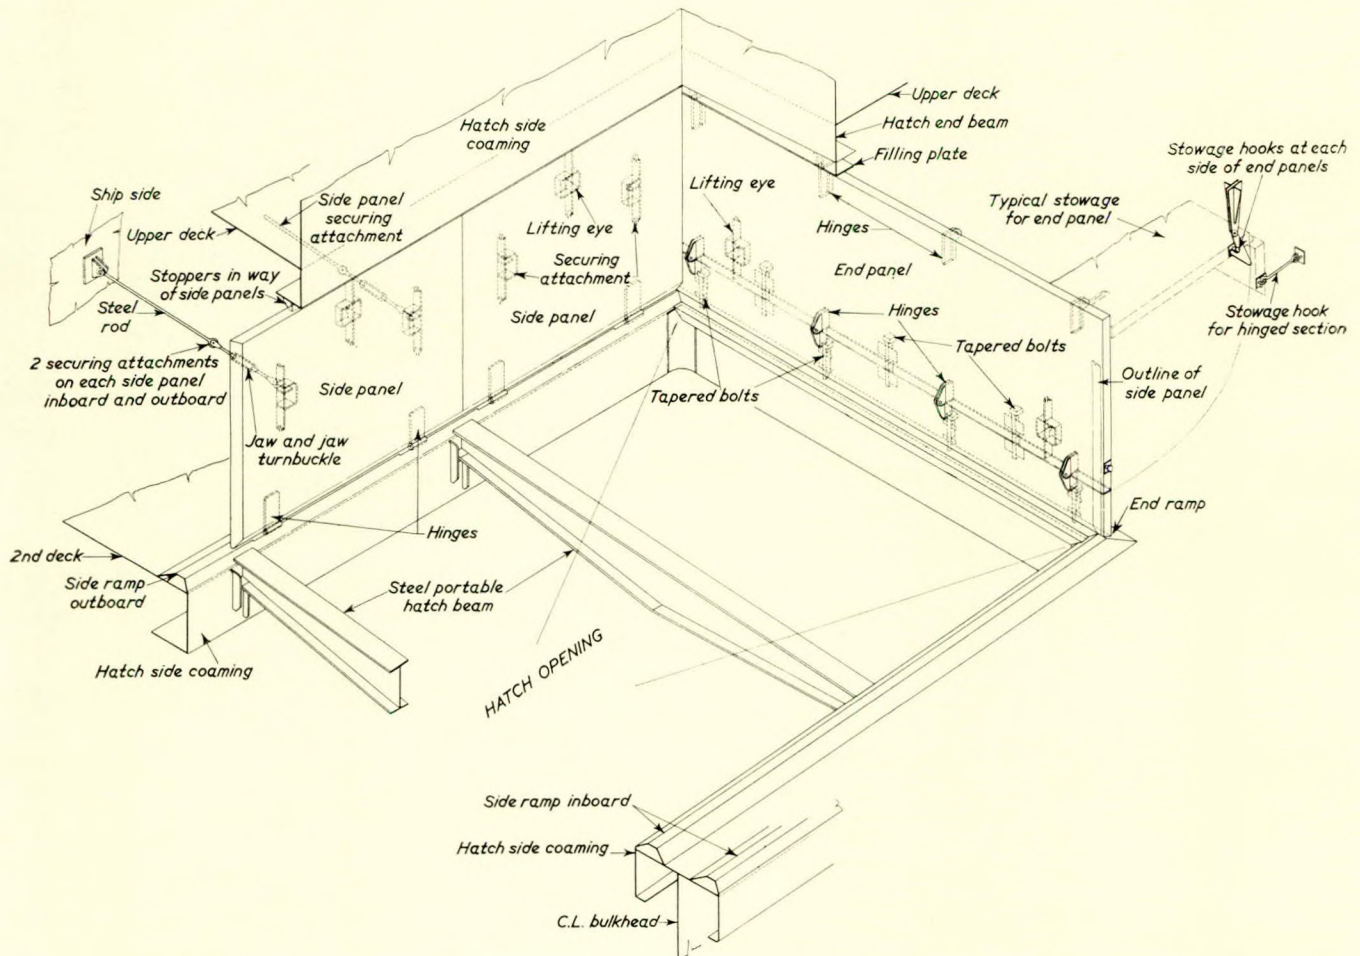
Isometric view showing typical scheme of hatch covers and end panels when forming grain feeders
